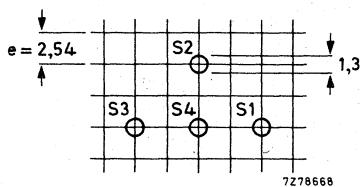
Hole pattern for mounting on a printed-wiring board (solder side).
